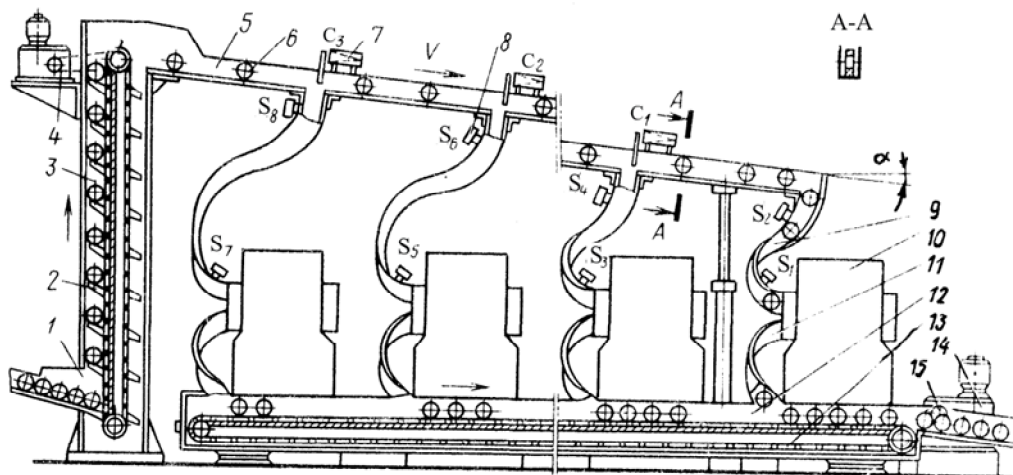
The scheme of a transport system of the turning division of an automatic workshop: 1 – a receiving tray; 2 – lift conveyor grippers; 3 – the hoist; 4 – a lift conveyor drive gear; 5 – a distribution conveyor tray; 6 – part components; 7 – lids; 8 – overflow sensors of feed trays; 9 – feed trays of machine tools; 10 – machine tools; 11 – output trays of machine tools; 12 – a run-out conveyor; 13 – a conveyor rolling-bushing chain; 14 – a branch conveyor drive gear; 15 – an output tray to the following site
